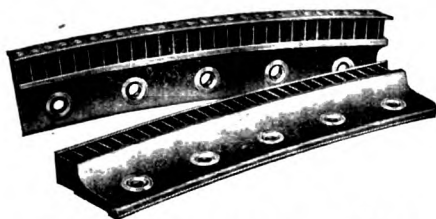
REVOLVING BUCKETS FOR 2,000 K. W. CURTIS STEAM TURBINE.
